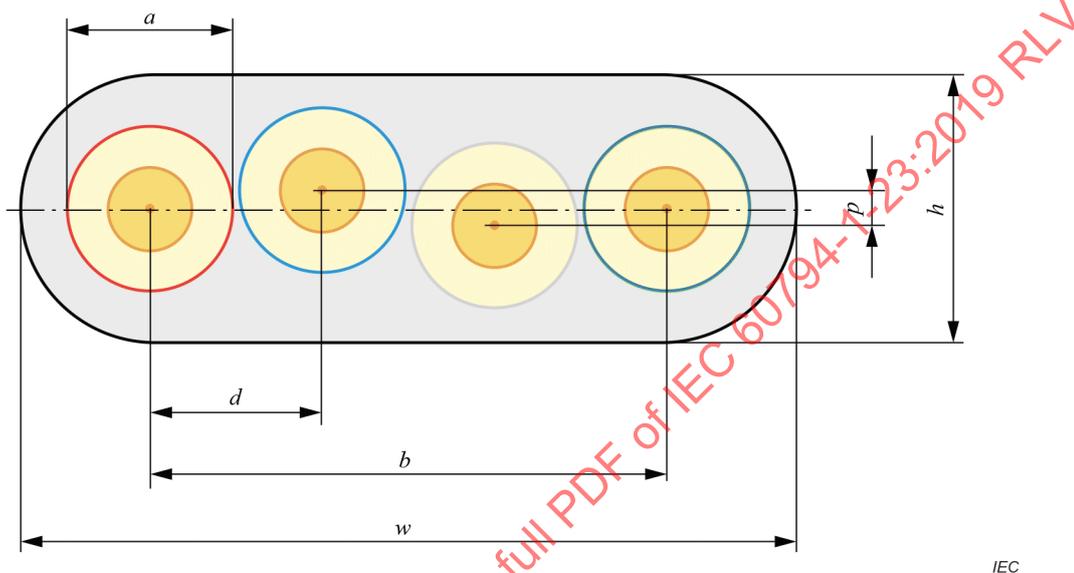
Cross-sectional drawing illustrating fibre ribbon geometry
